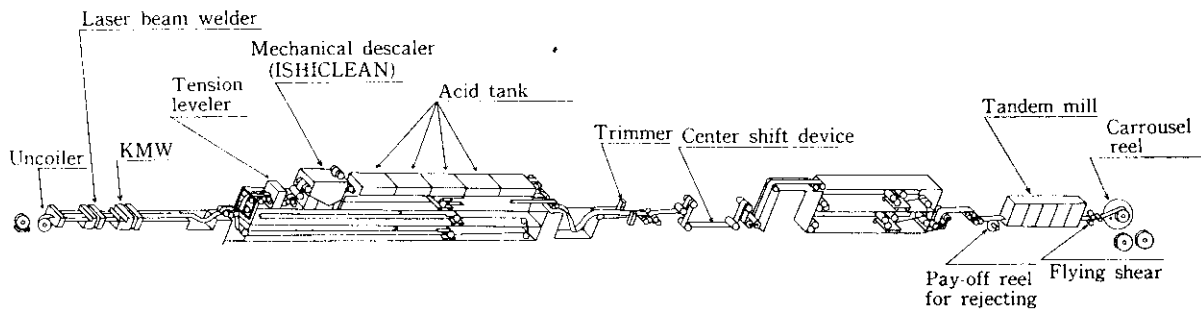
Outline of fully continuous descaling and cold rolling mill
